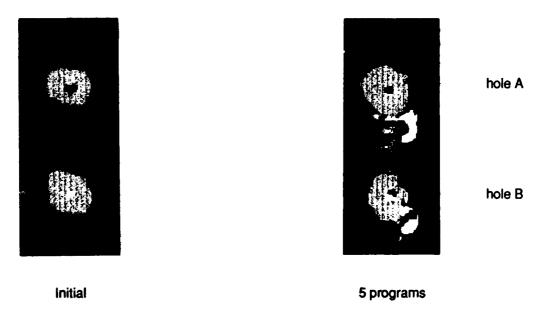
In-situ ultrasonic C-scan maps illustrating damage growth around the fastener holes, with fasteners installed, in a CFRP bolted joint specimen.
